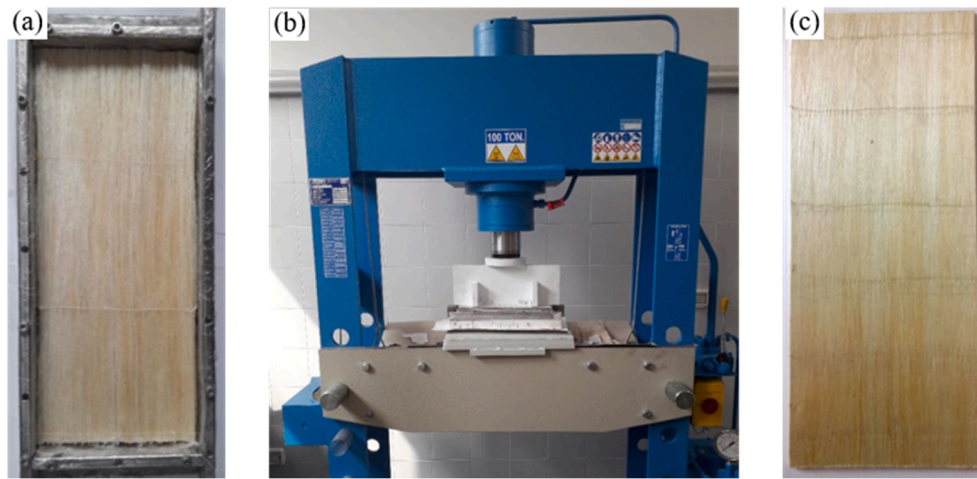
Biocomposite manufacturing: (a) hand lay-up inside the mold, (b) mold, counter-mold and press used for the thermo-mechanical compression moulding and (c) biocomposite panel obtained. (For interpretation of the references to colour in this figure legend, the reader is referred to the web version of this article.)
